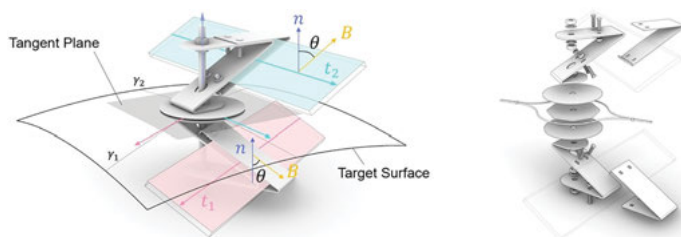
Alignment of connector with respect to the given surface (left) and exploded view (right).
